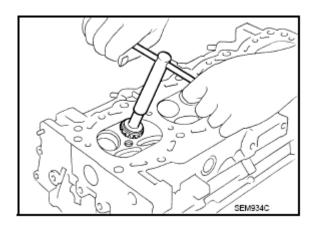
Finishing Valve Seat Using Valve Seat Grinder
